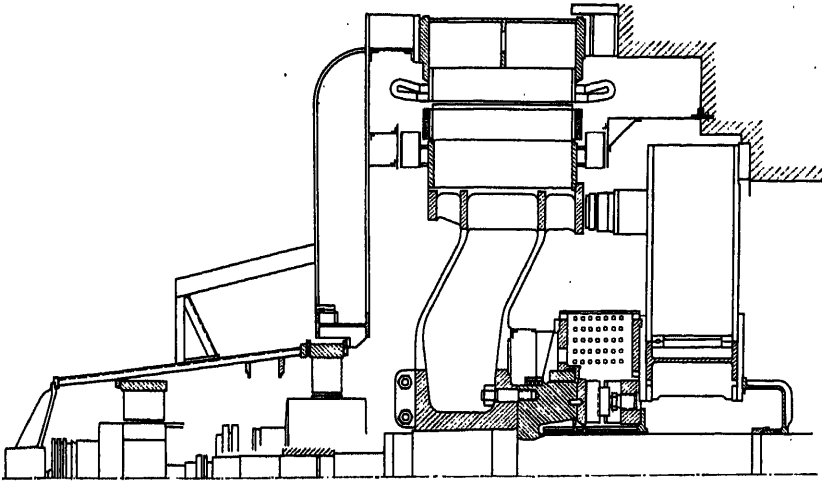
Cross-section drawing of a typical single guide bearing, vertical shaft generator. The guide bearing and the thrust bearing are located in the same housing. Both are of the segmental shoe type. The generator has a direct-connected pilot exciter for exciting the main exciter. Collector rings at the top of the pilot exciter provide alternating current for turbine governor. This design, as others of American make, avoids castings for heavy sections.
